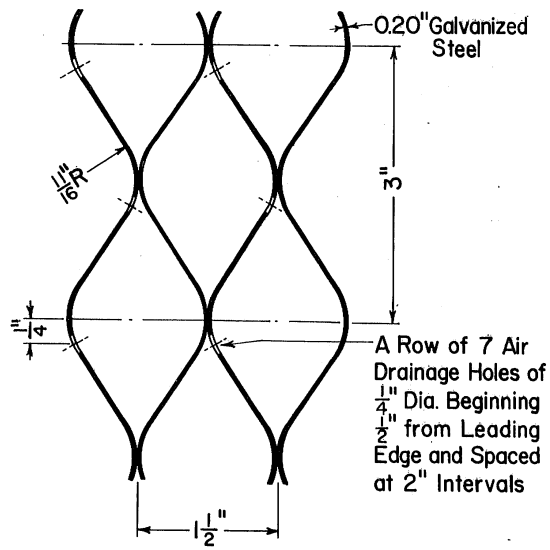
Configuration of Gas-Separator Tube Employed in Tunnel Tests
